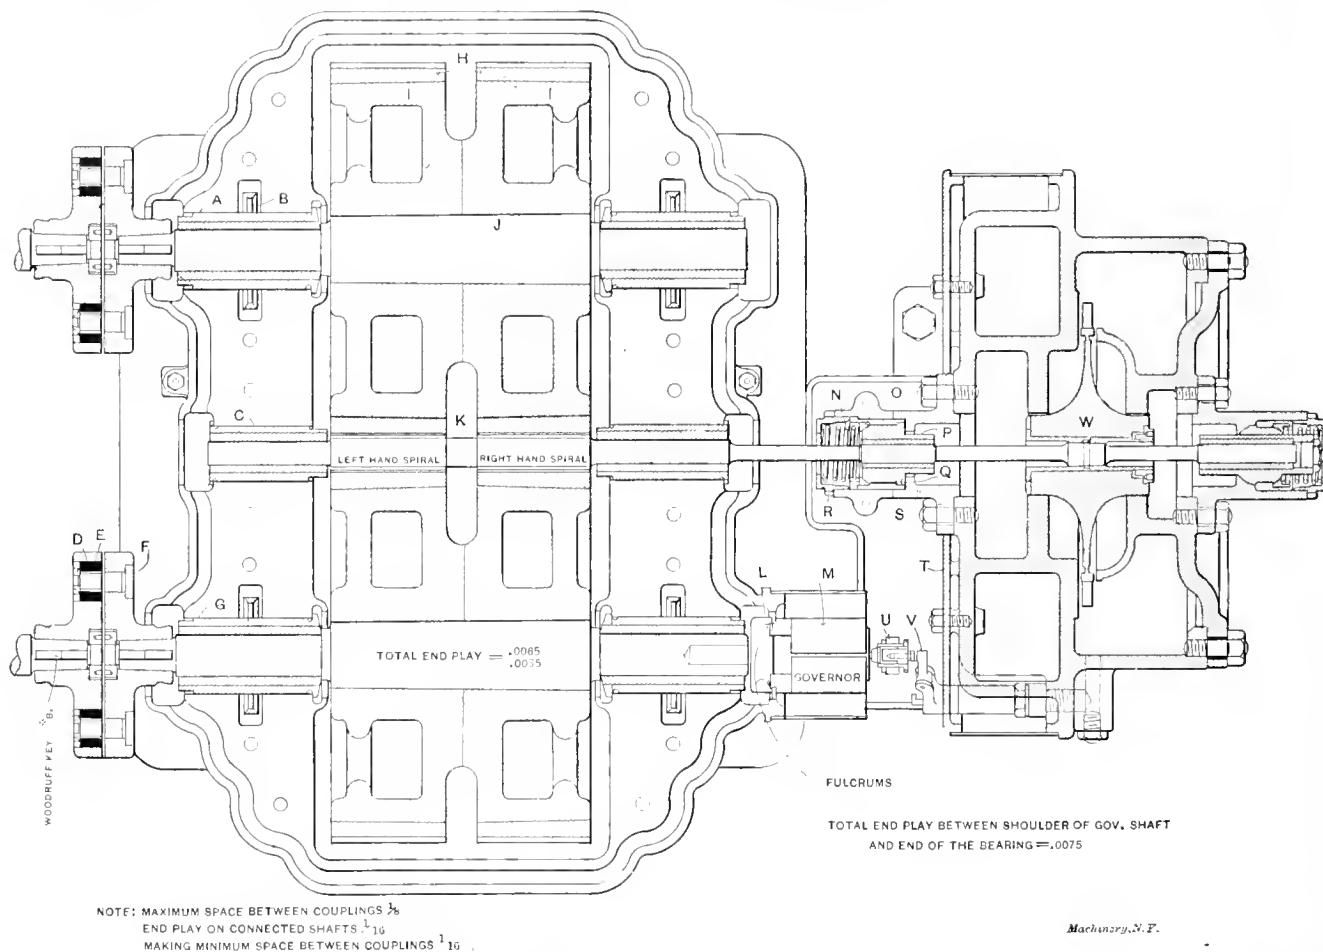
Horizontal Section of De Laval Steam Turbine.
